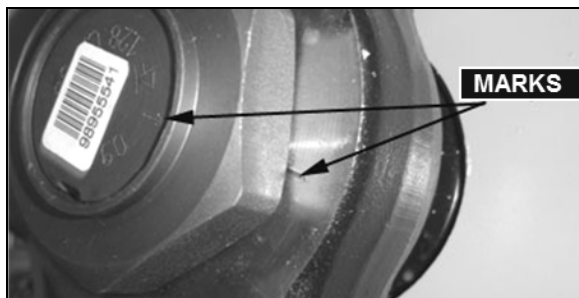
STEERING GEARBOX OUTPUT SHAFT AND PITMAN ARM MARKS ALIGNED
